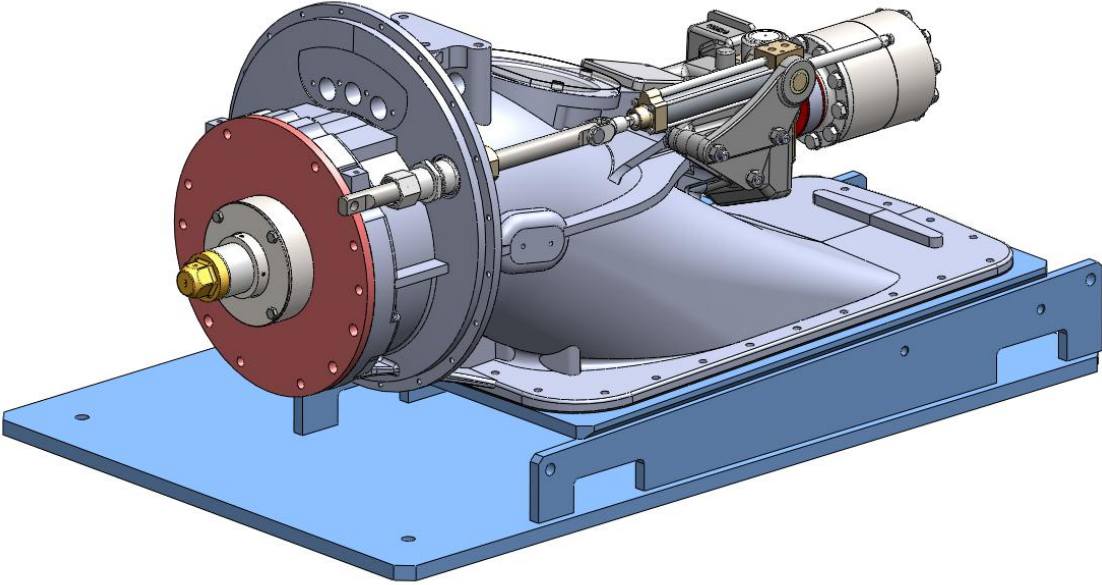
Alternative Bearing Assembly Fitted to the HJ364 Test Rig
